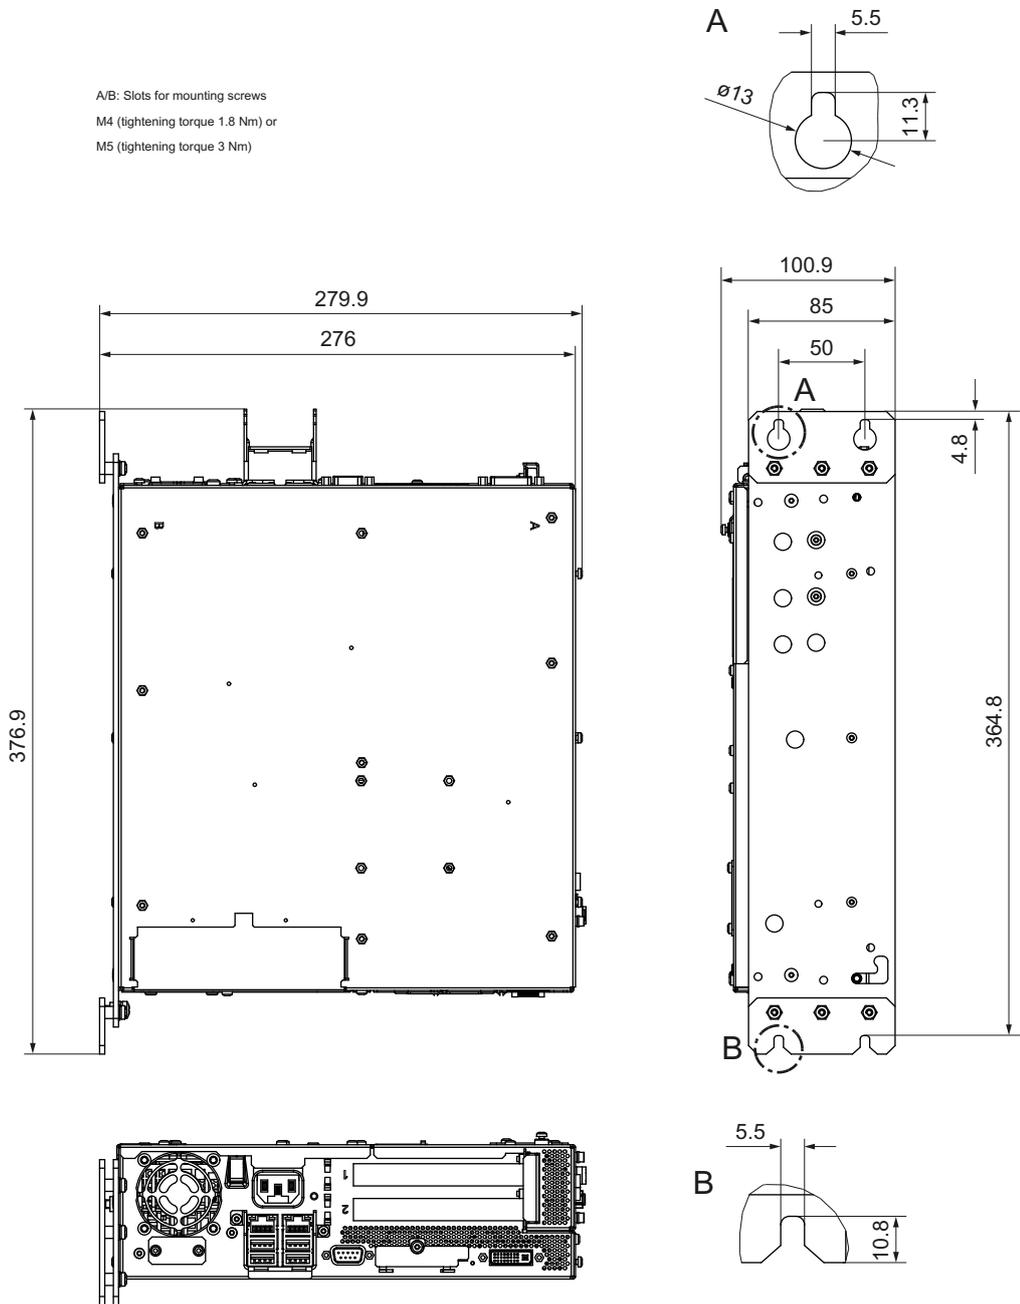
Dimension drawing for the upright mounting of the PCU 50.5 (power switch at the top)
